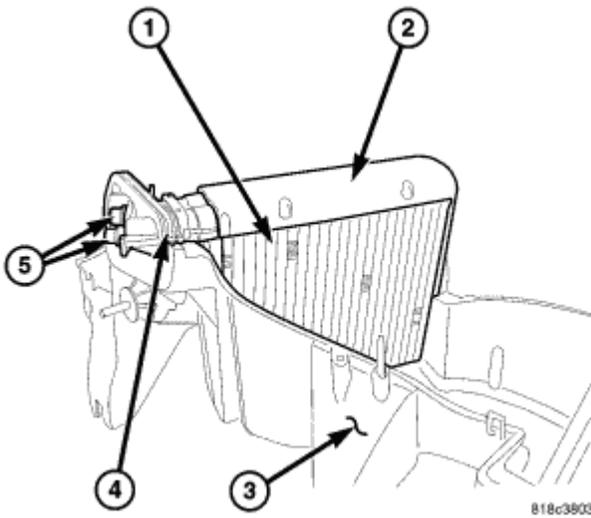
A/C Evaporator, Foam Insulator, HVAC Housing, Rubber Seal & Tapping Block
